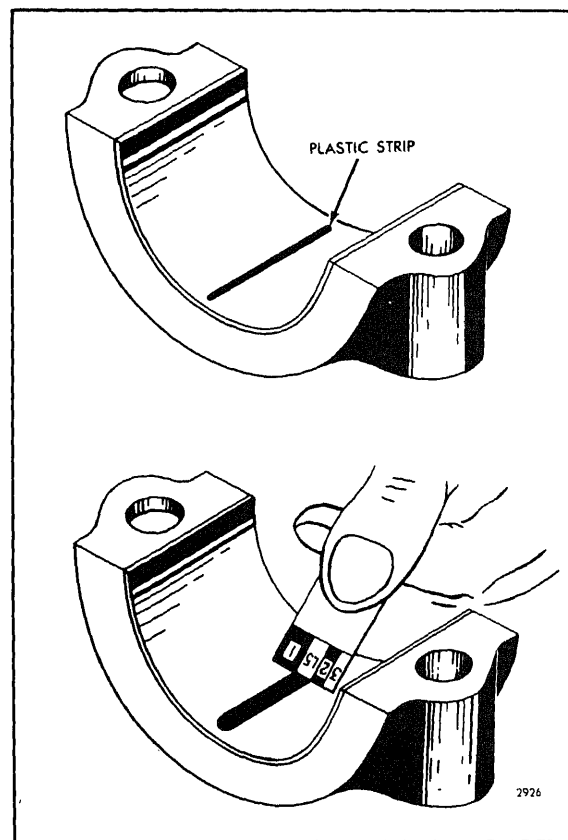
Using Plastic Strip to Measure Bearing-to-Crankshaft Clearance
